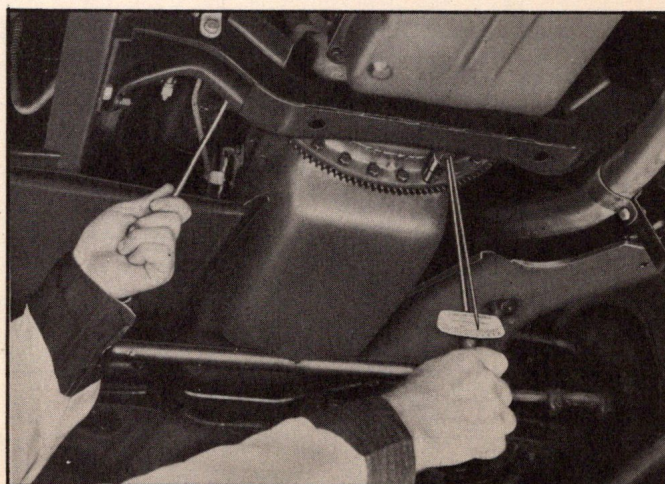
Tightening Torus Cover to Flywheel Bolts with Torque Wrench
